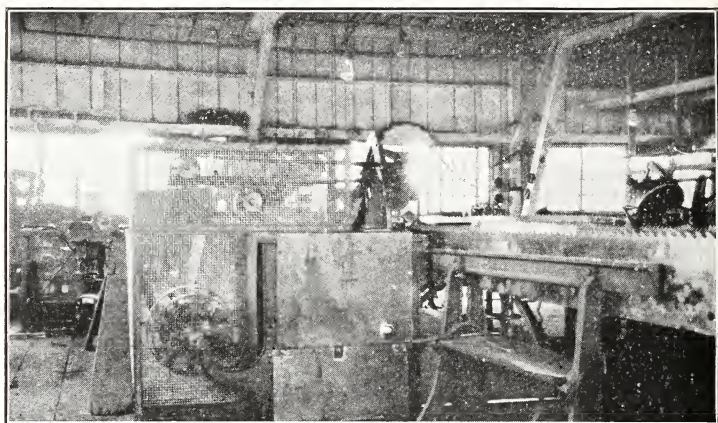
Guards for band-saw grinder; side view. (Rule 268.)
